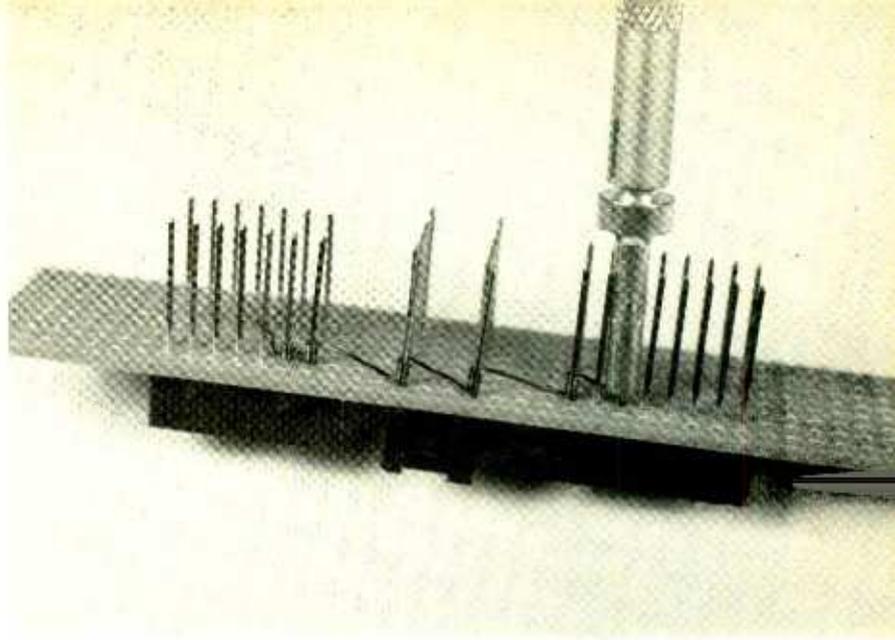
PENCIL WIRING SYSTEM also requires perforated board and soldering iron.
